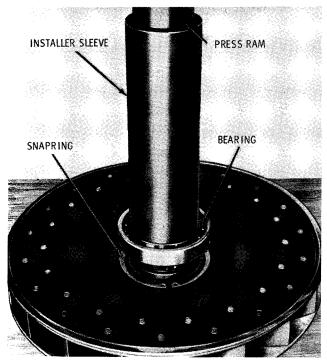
Installing snapring and bearing on converter pump shaft (VH series)
